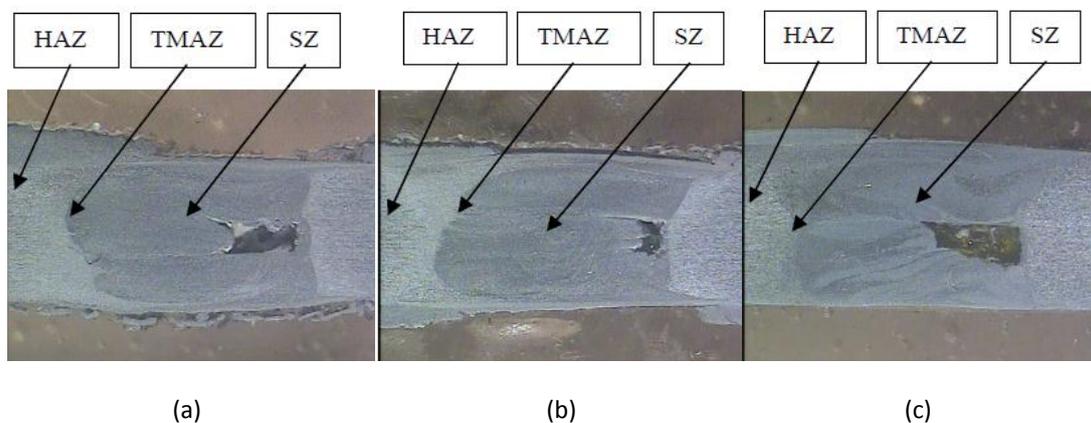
Macrostructure of Weld Metal with preheat Temperature (a) 100°C (b) 150°C (c) 200°C
